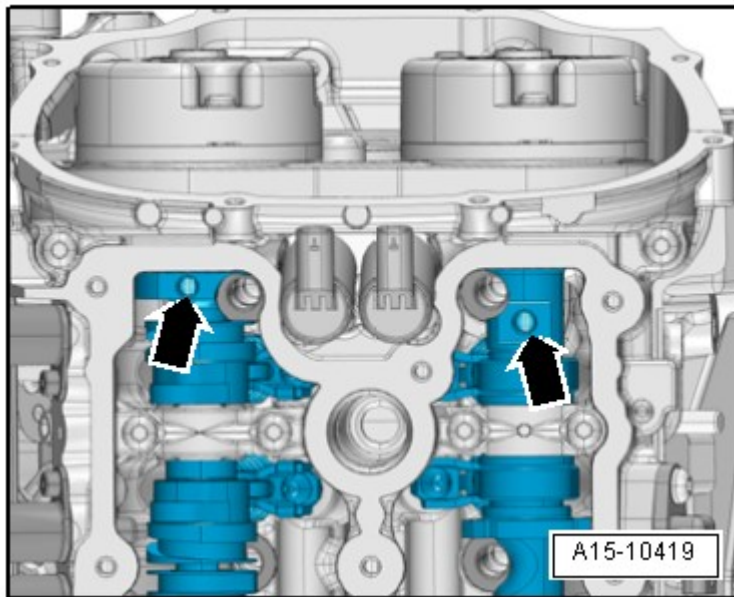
Identifying Camshaft Threaded Hole Alignment
